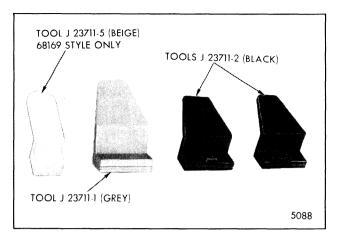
Glass Alignment Gauge Blocks, Tool J-23711 or Equivalent
